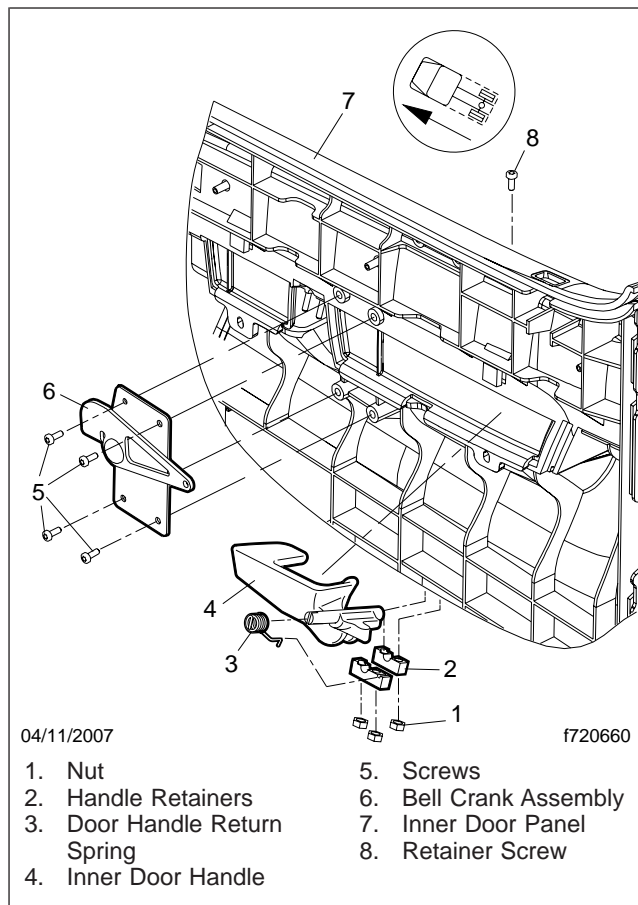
, Bell Crank Assembly and Inner Door Handle Installation
